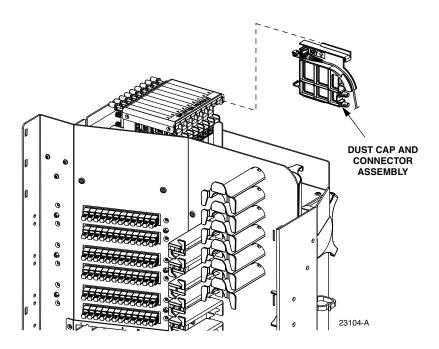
Inserting Dust Cap Assembly Into Splitter Compartment
